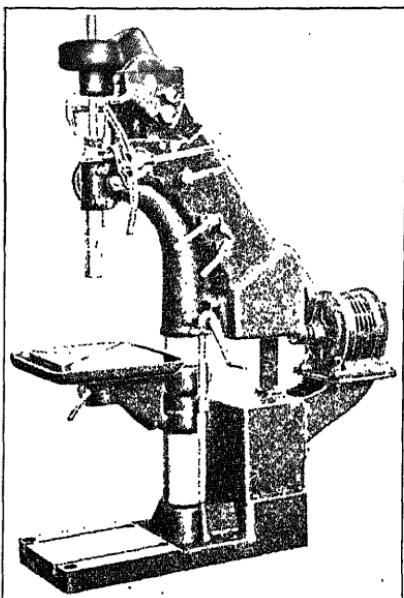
All-gearied drill press. Barnes Drill Company, Rockford, Ill.
